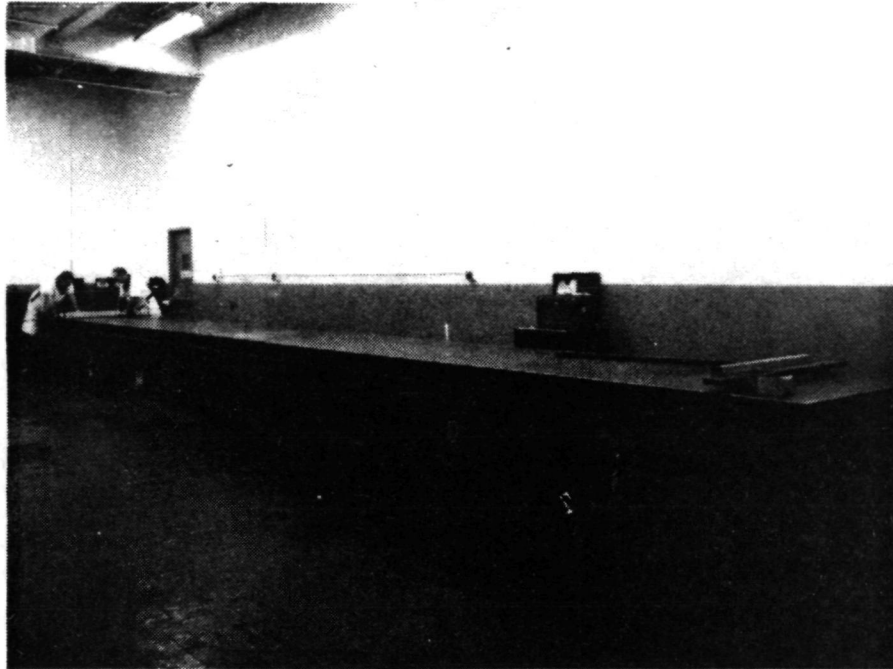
COOL TOOL: FORTY FOOT TOOL FOR BONDING BORON-EPOXY STRIPS TO PLANKS AND STRINGERS.
